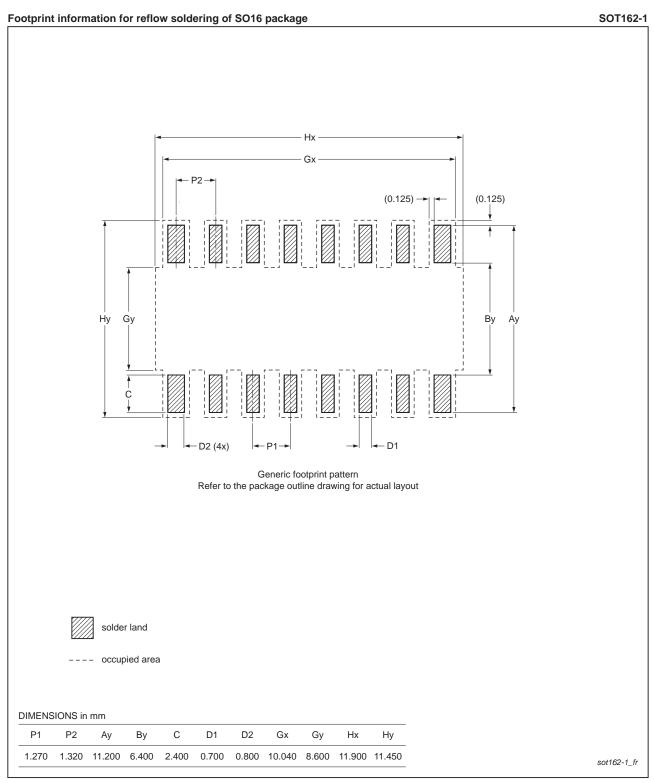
PCB footprint for SOT162-1 (SO16); reflow soldering
